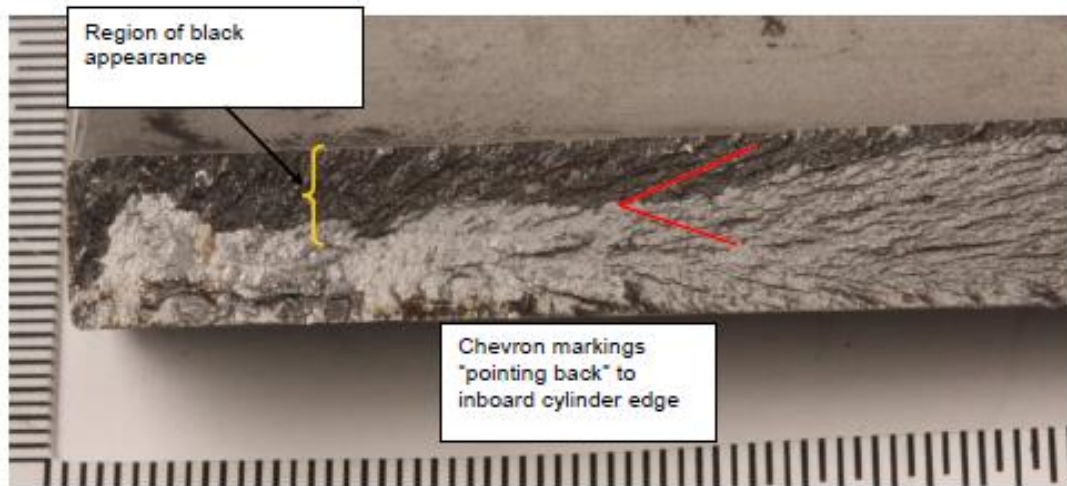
Showing the detail of fracture surface 'B2'.
